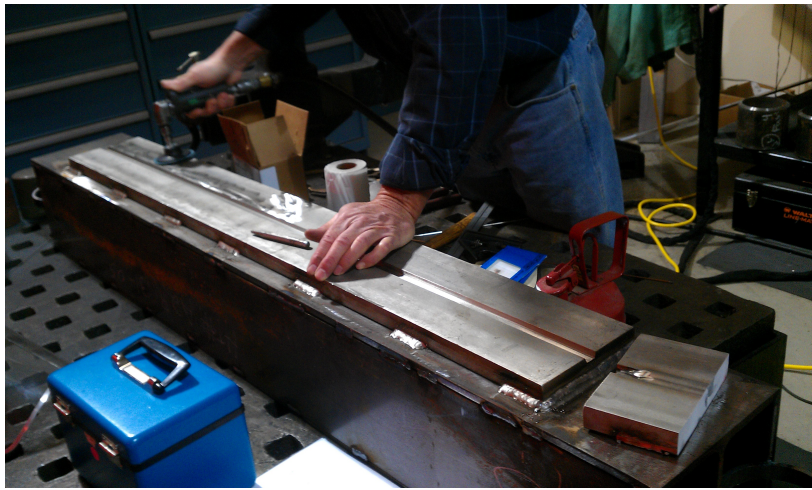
Plate on I-beam after completion of tack welds
